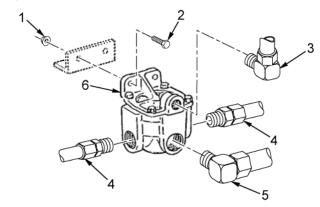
Location E, Pipe Sealant Compound to Male Threads Installation.
